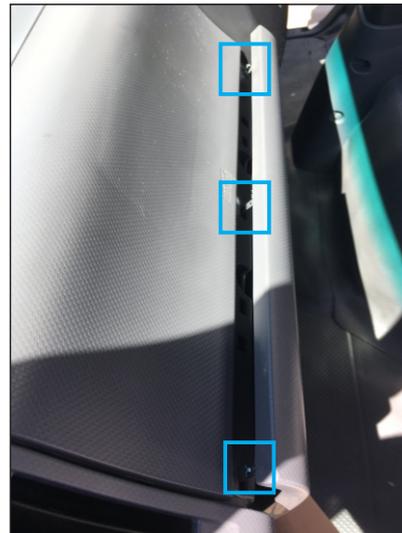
PASSENGER DASHBOARD CLIP REMOVAL
